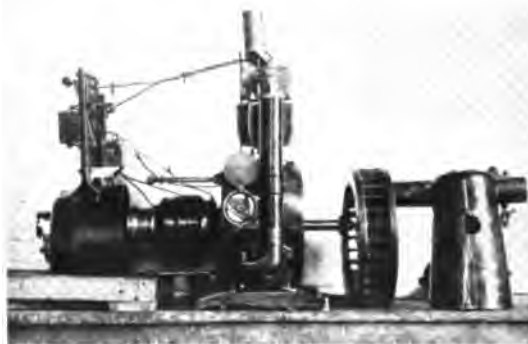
DELCO ENGINE DISASSEMBLED EXCEPT AS TO WIRING.
